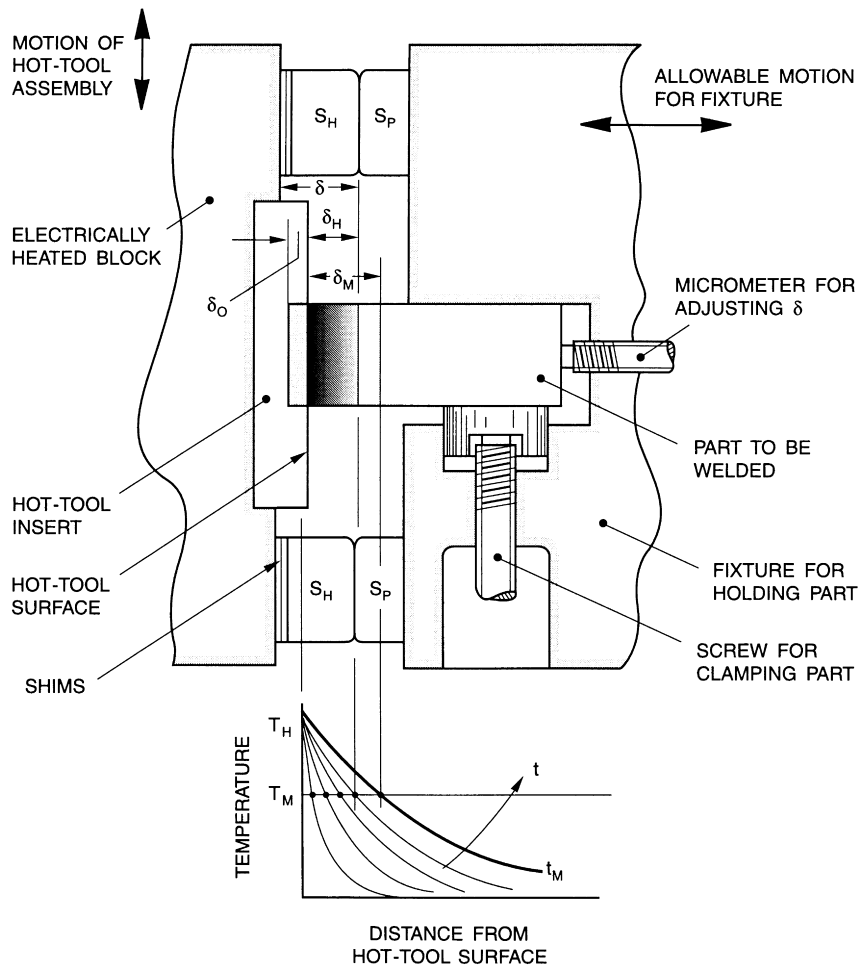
Schematic diagram showing geometric parameters for displacement-controlled hot-tool welding using mechanical stops.
